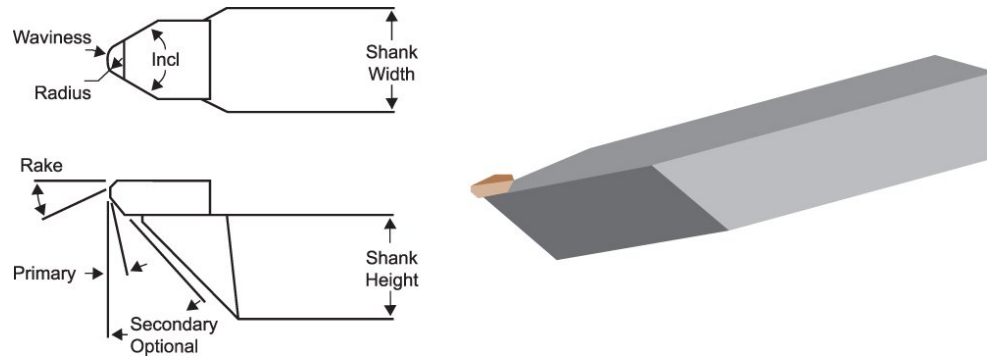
Ultra precision diamond turning tool geometry. [4]
